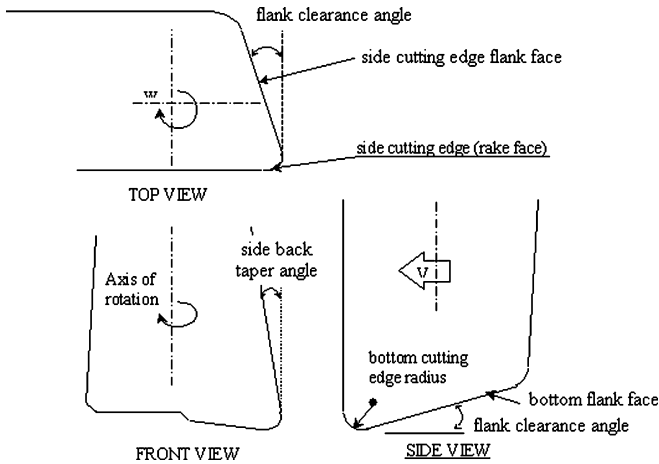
Orthographic views of two-fluted micromilling tool showing multiple bottom and side cutting edges and taper and clearance angles
